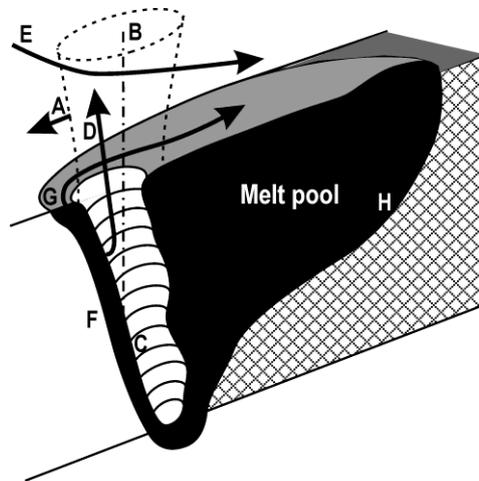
Scheme of keyhole mode (A): welding direction, (B): laser beam, (C): keyhole, (D): vapour jet, (E): shielding gas flow, (F): melting front, (G) melt flow passing around the keyhole, (H): solidification front [1]
